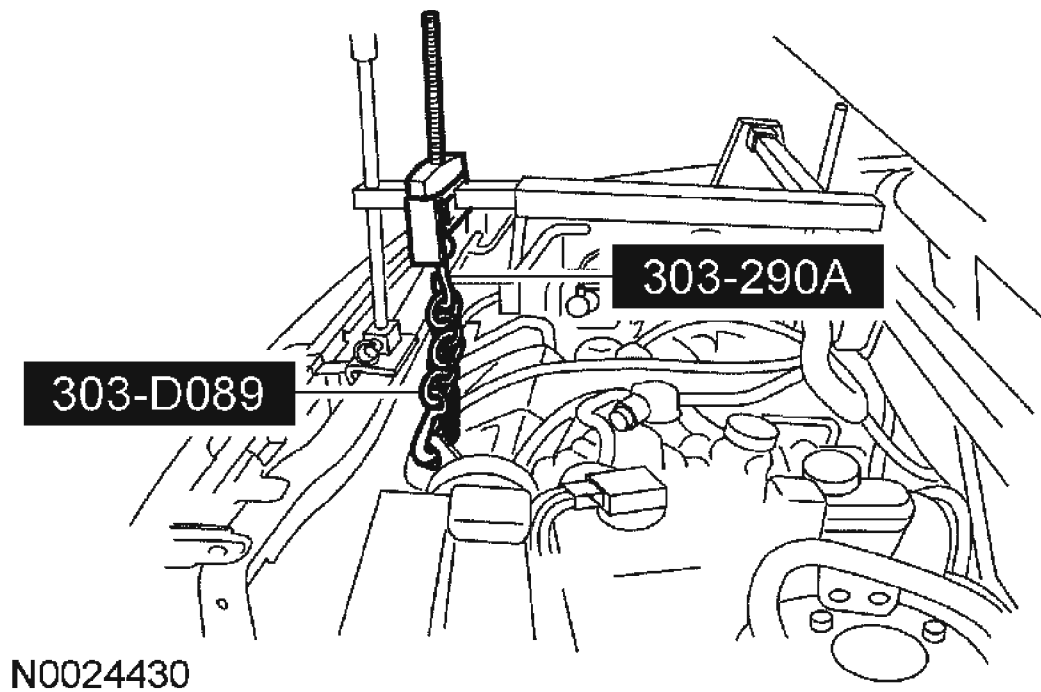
Removing Transfer Case Bolt And Transfer Case Unit
